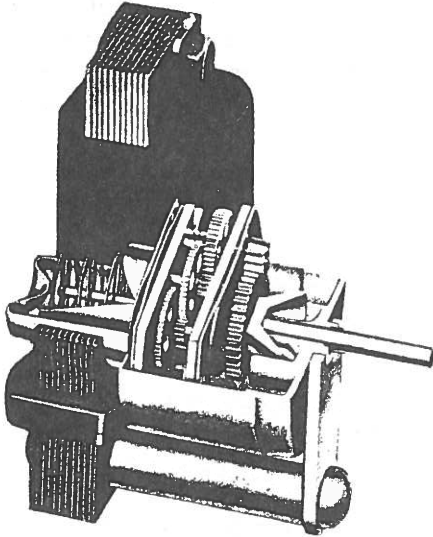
Cutaway View of Telechron Type "B" Motor
